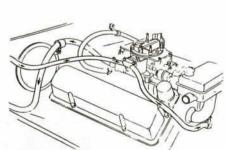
And 390 C.I.D. Engine Heater Hose Routing
